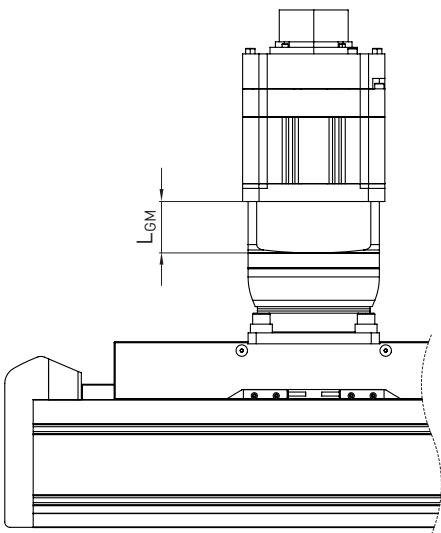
Motor connection of linear table HT-B without gearbox
